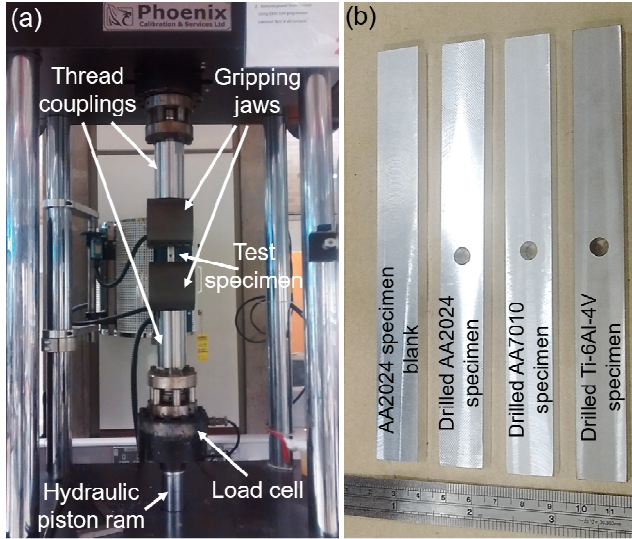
(a) Fatigue test setup and (b) sample test specimens.
